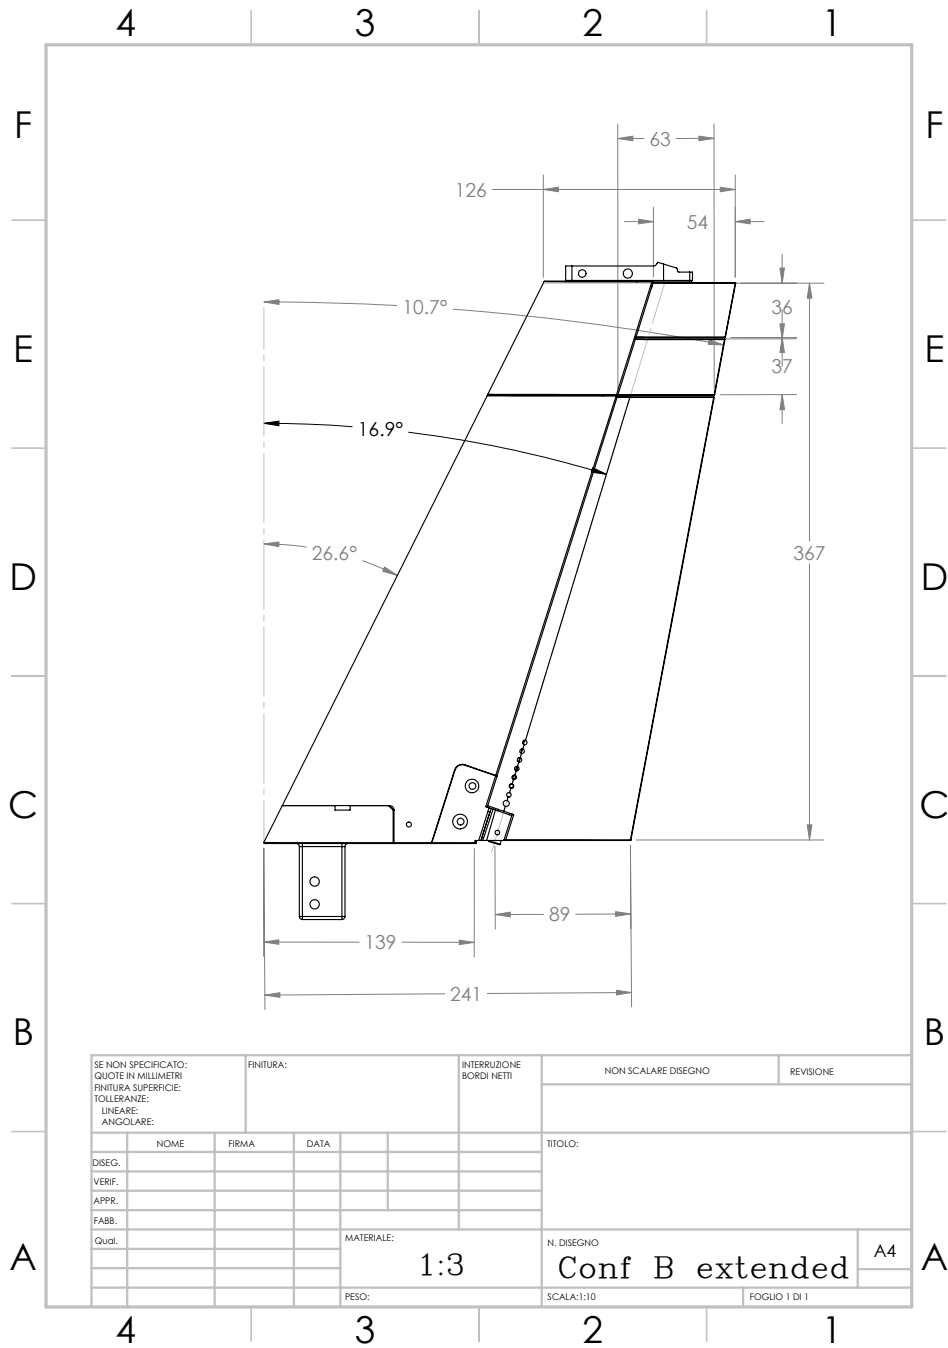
CAD model of tail assembly B with $\mathcal{R} = 2.0$.
